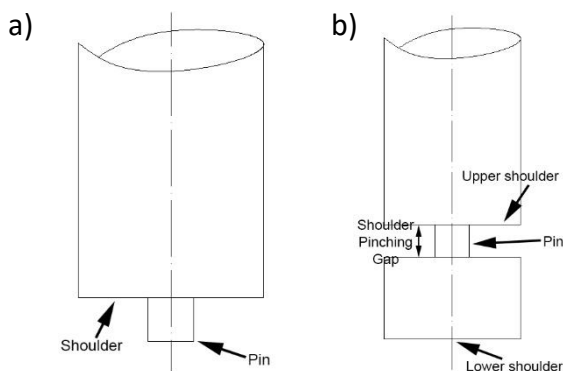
Friction Stir Welding tools; a) Conventional FSW tool, b) Bobbin FSW tool.
